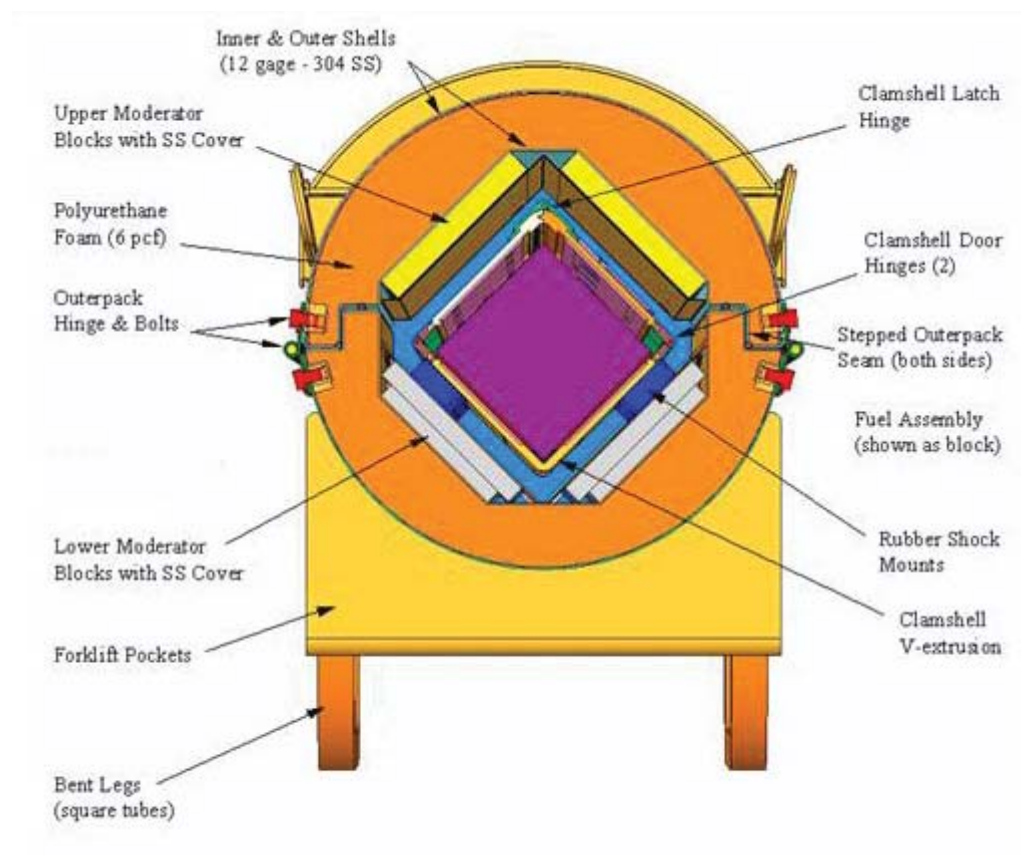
Outerpak Cross-Section View (typical) Clamshell
